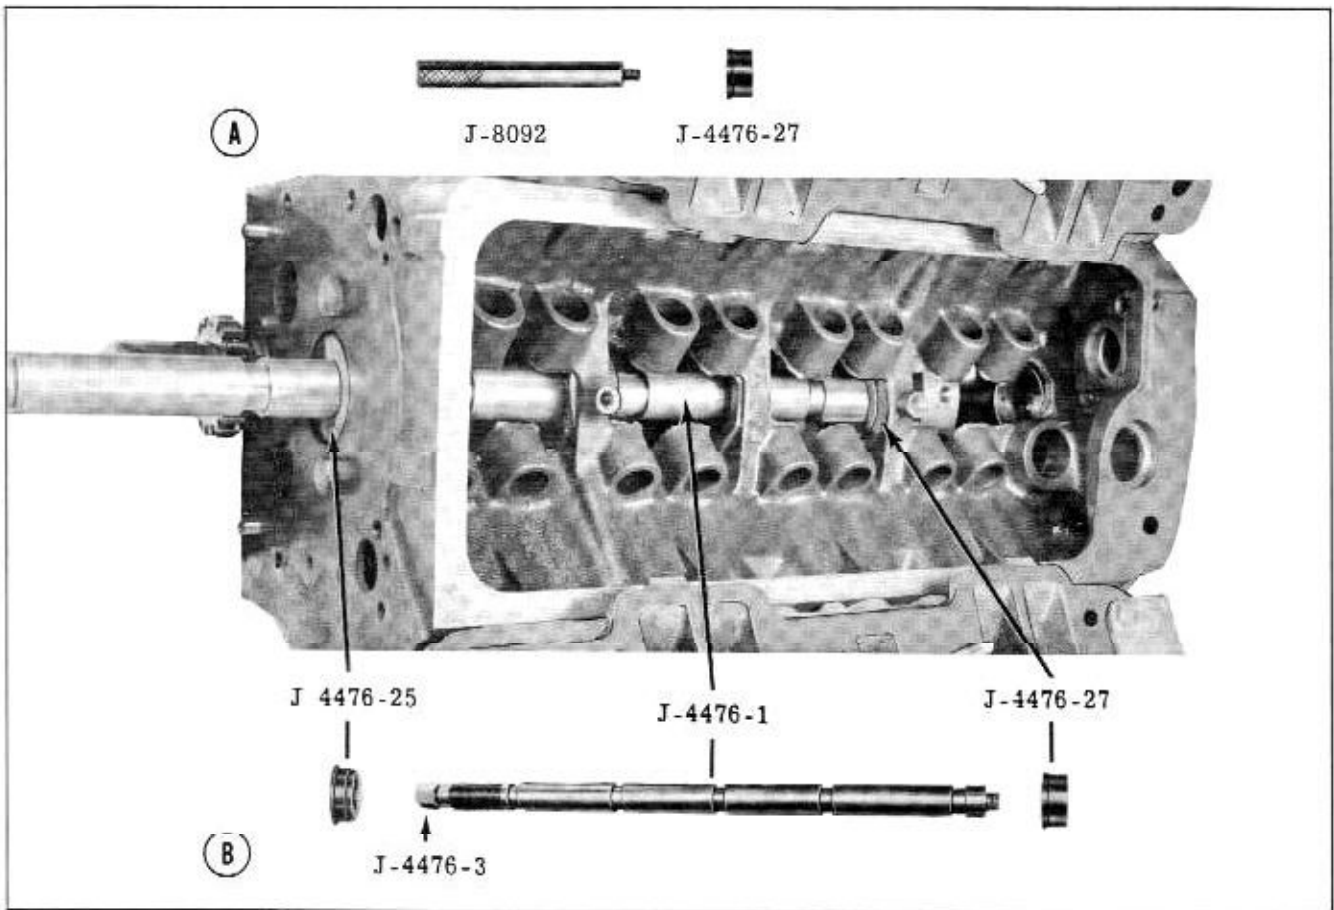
Removing No. 4 Camshaft Bearing (Typical of 1, 2, and 3)
